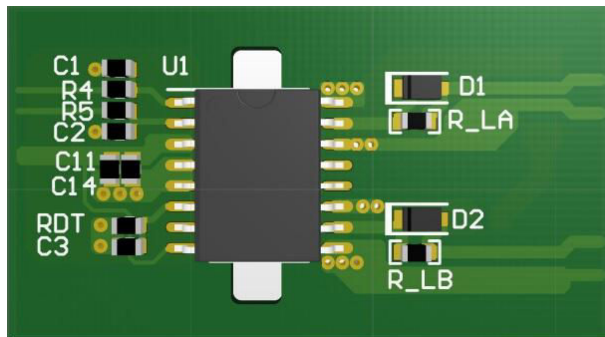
and Figure 12-5 are 3-D layout pictures with top view and bottom views.
